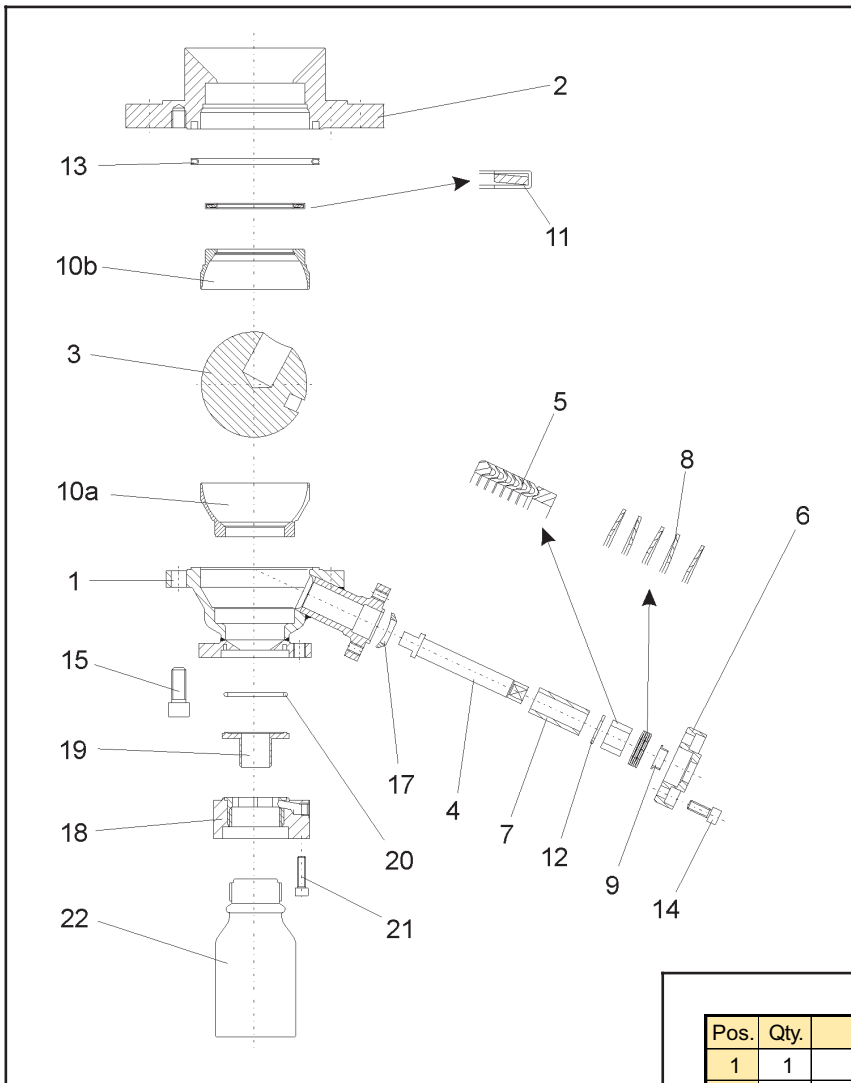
Explosion drawing of the sampling valve Series 27h
